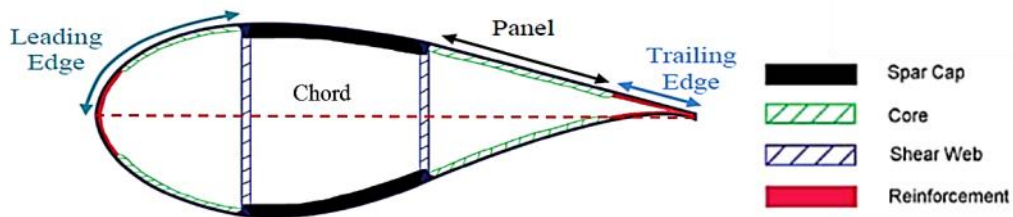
Components of wind turbine blade, cross sectional view, alternate design
